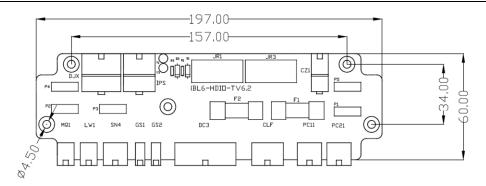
Component location and dimension of iBL6-HDIO-TV6.2
